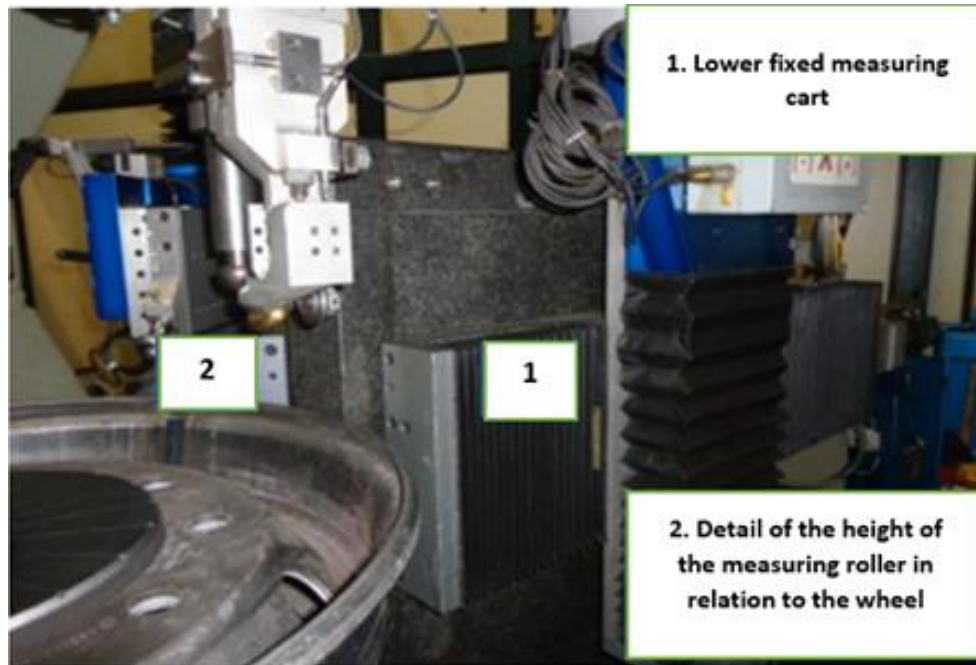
Changing the disc measuring carriage, the entire measuring carriage has been positioned about 200 millimeters lower than the previous position
